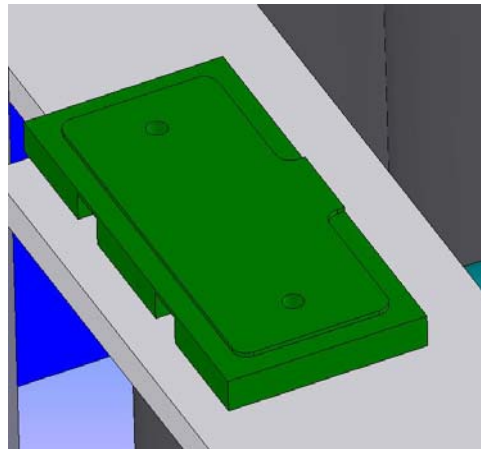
Pad flame welded to L-Bracket in furnace by plant personnel
